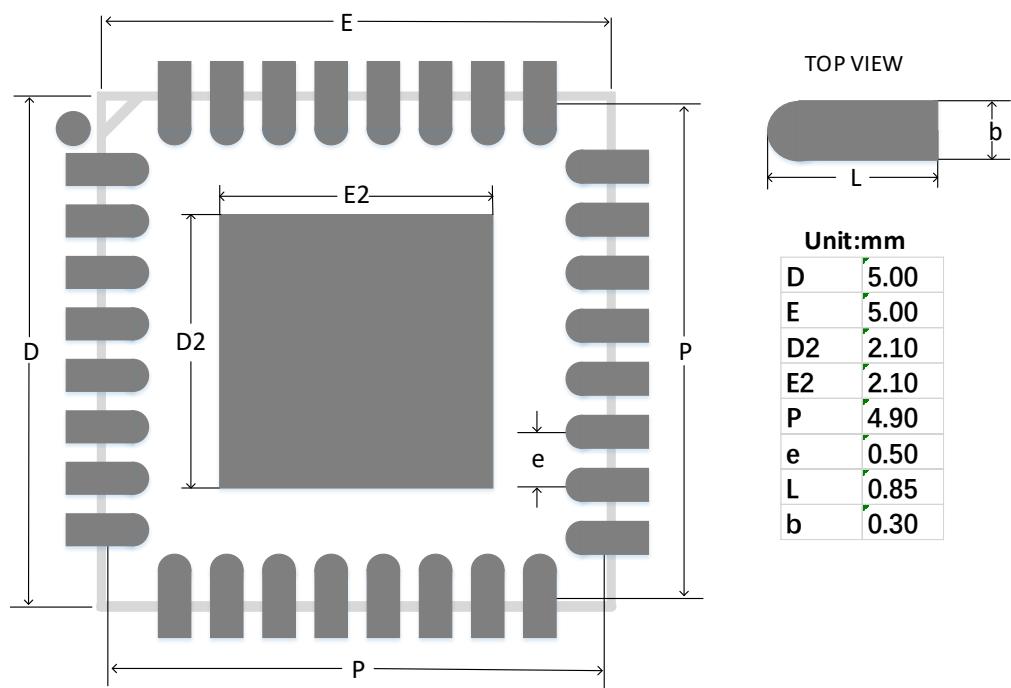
Recommended PCB Layout QN32(GW1N-2)
